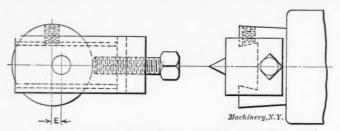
Tail-center for Threading Lathes, permitting Slight Tapers to be obtained without Setting over Tail-stock proper.
